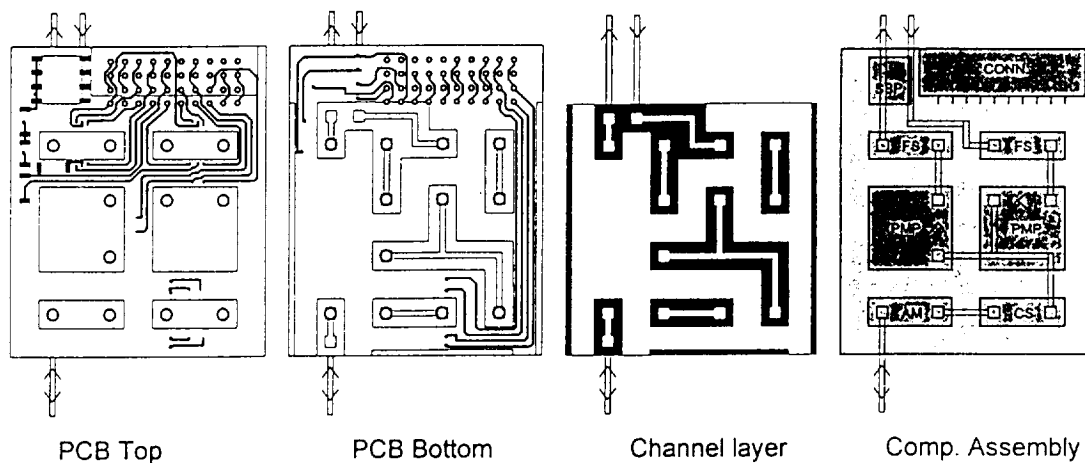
Schematics of floorplan with mixed electrical and fluid connections
